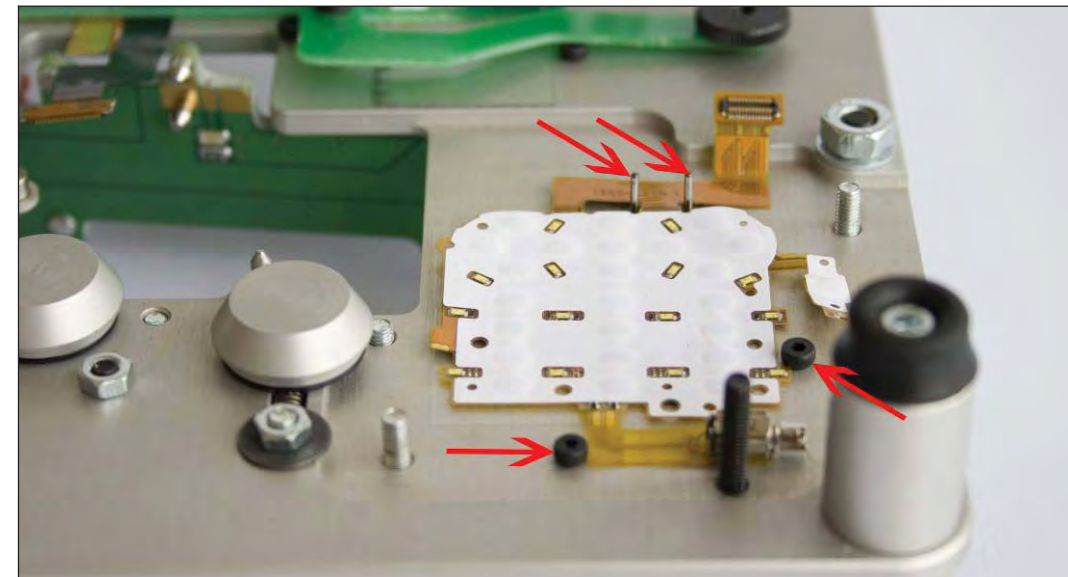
Place the keyboard flex module in position. Position the keyboard flex module with the two position pins and two screws.
